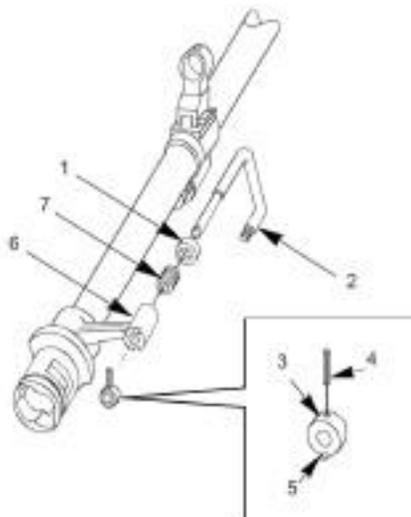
Barrel Assembly, Collar, Spring Pin, Bushing, Spring Handle
